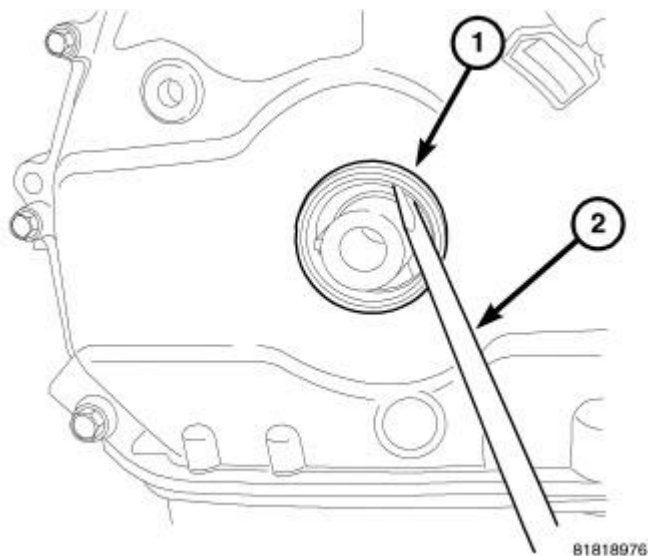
Removing Front Crankshaft Oil Seal By Prying Out With Screwdriver
